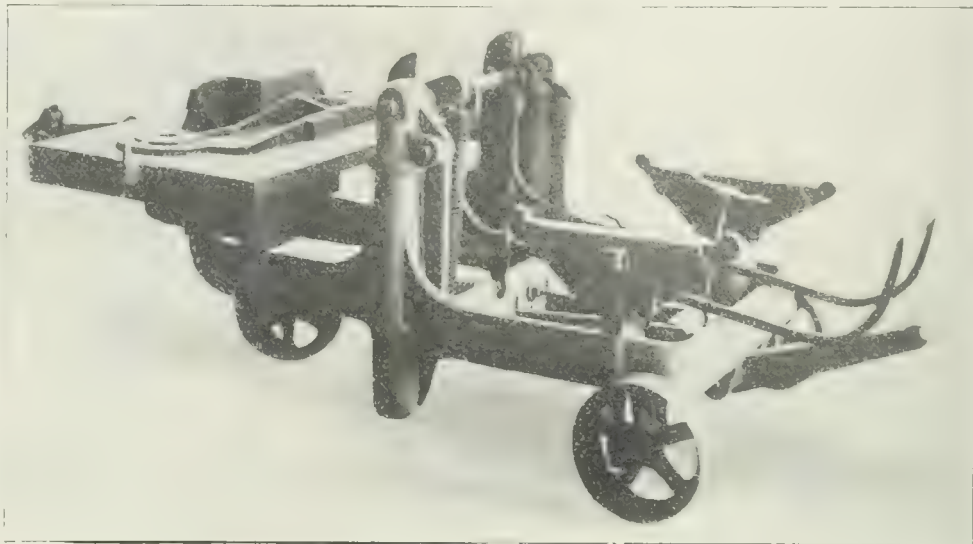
The Type R Edward A. Pridmore Turn-Over Machine with 14 In. Draw
